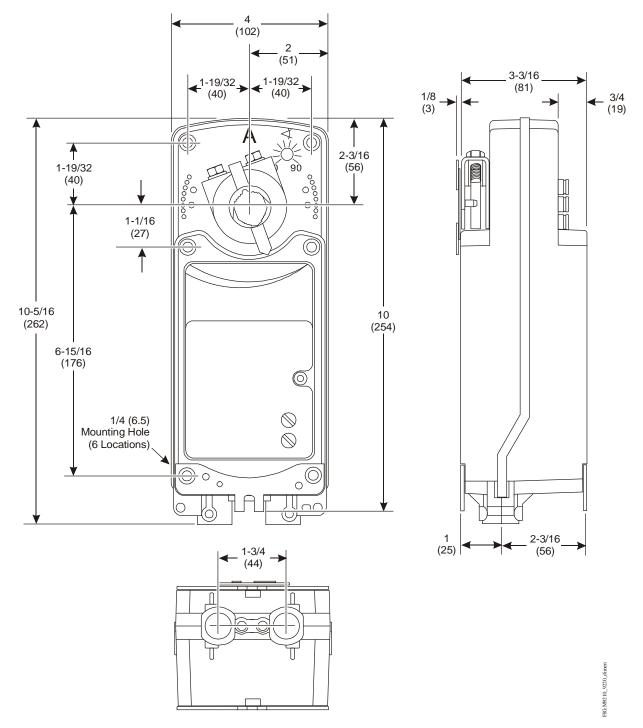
M9220-HGx-3 Proportional Electric Spring Return Actuator Dimensions, in. (mm)
